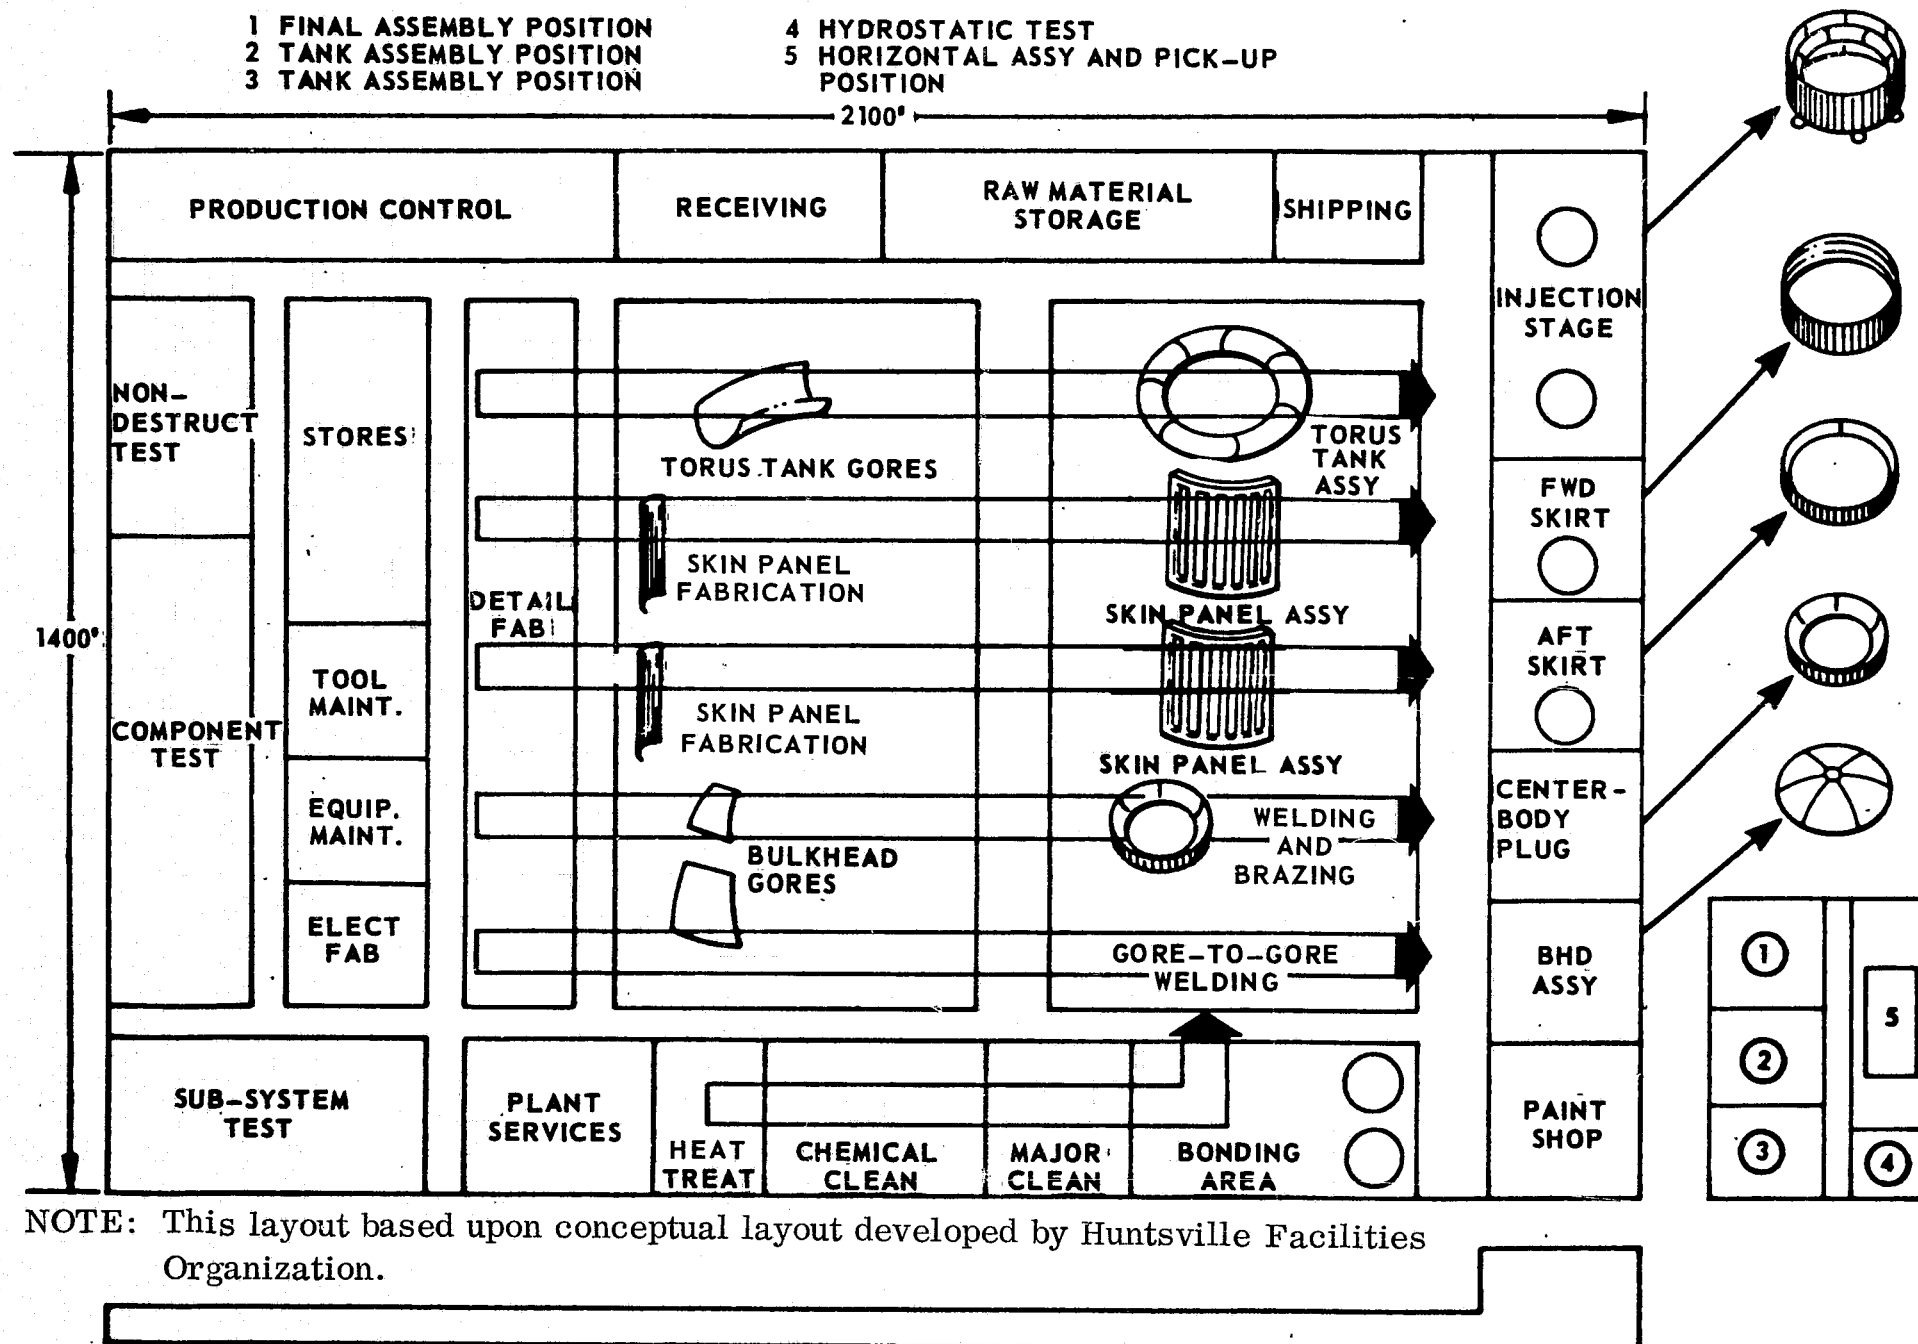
MAIN AND INJECTION STAGE MANUFACTURING FACILITY
